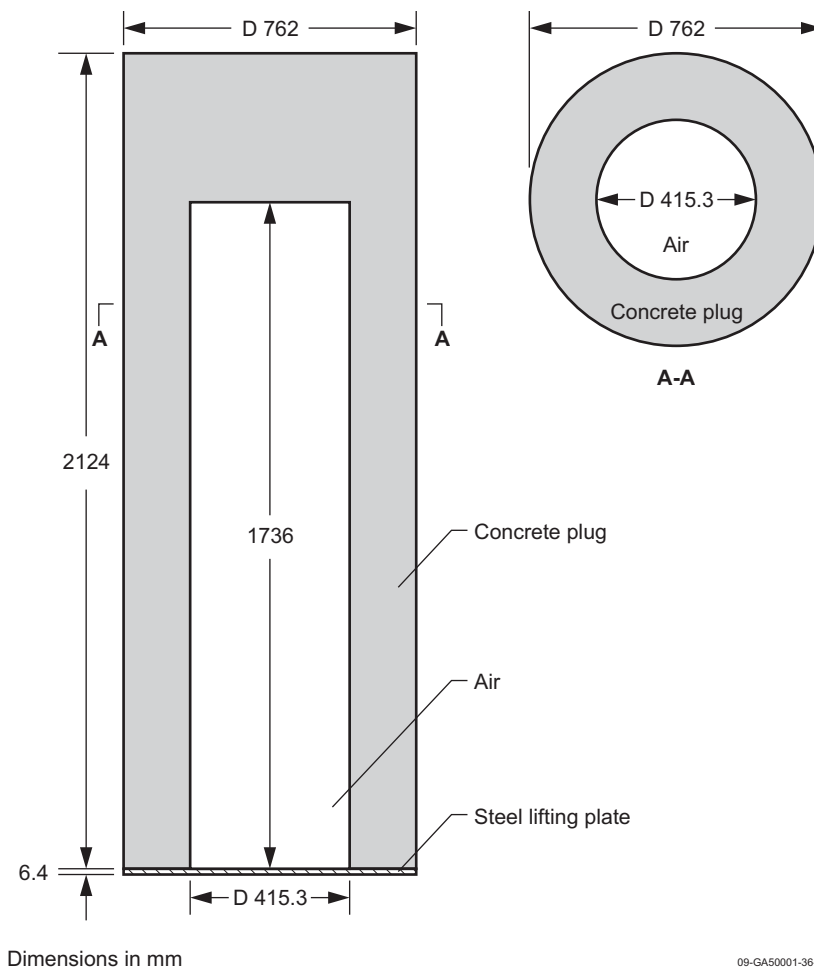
Vertical Cylindrical Cross Section Reported for the 30 × 0, 1.2% B Concrete Plug.
